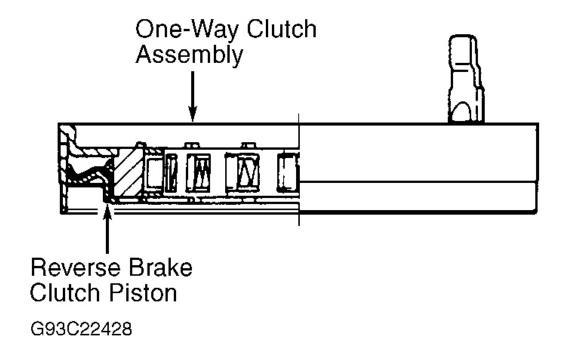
Installing Piston Into One-Way Clutch Courtesy of AUDI OF AMERICA, INC.
